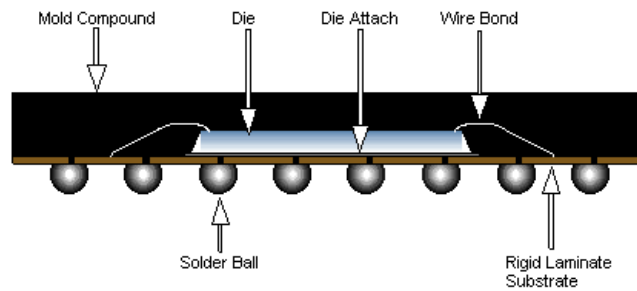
Wire bond package [20] (Courtesy of Amkor Technology)
